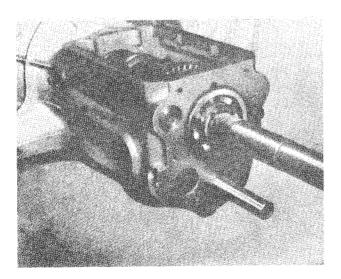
Showing Needle Roller Retainer Tube Tool No. 20SM68 being used to drive out Countershaft.
